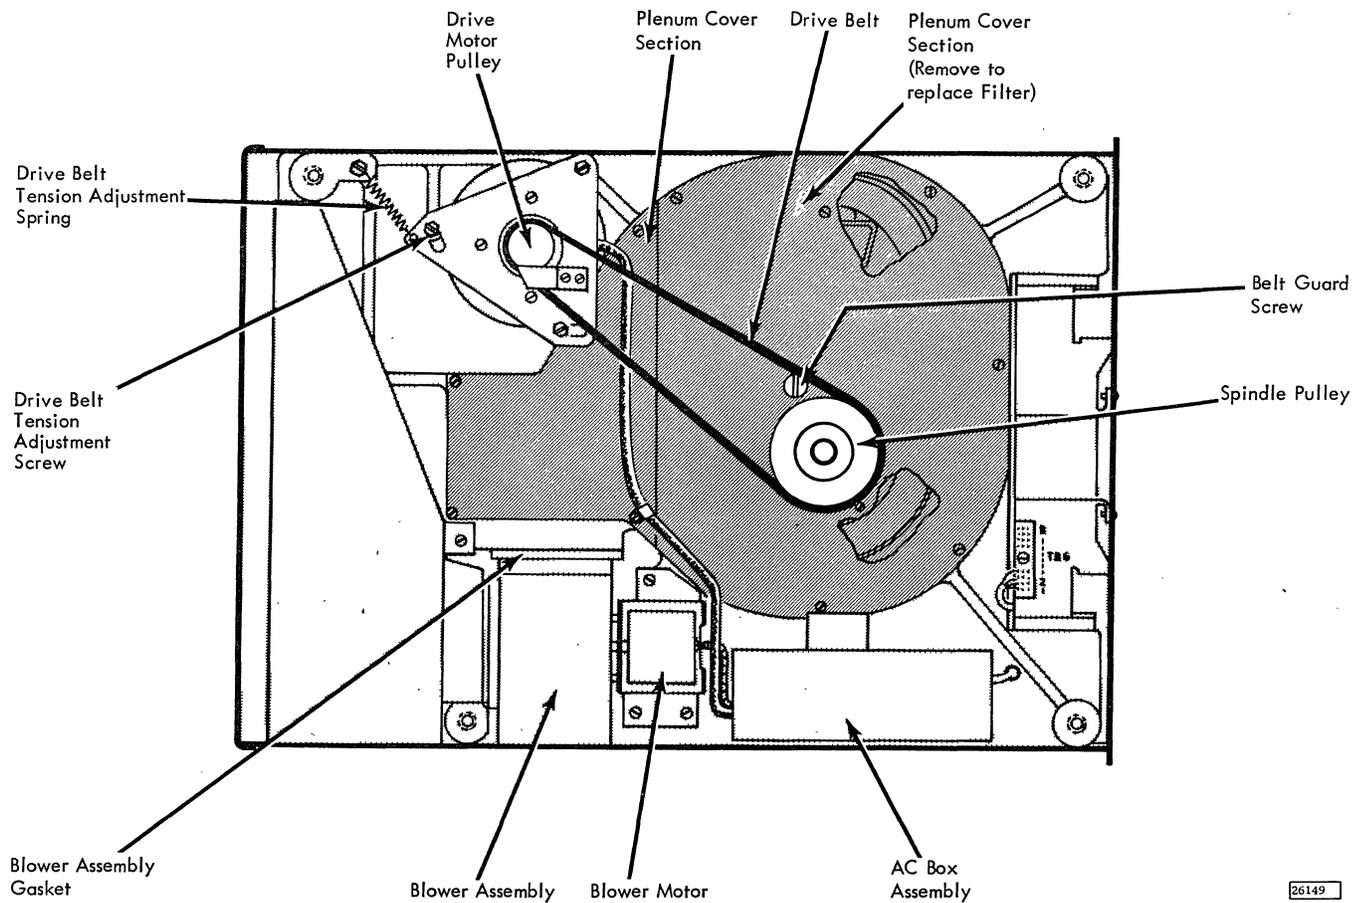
2310 Disk Storage Drive, Bottom View of Machine
